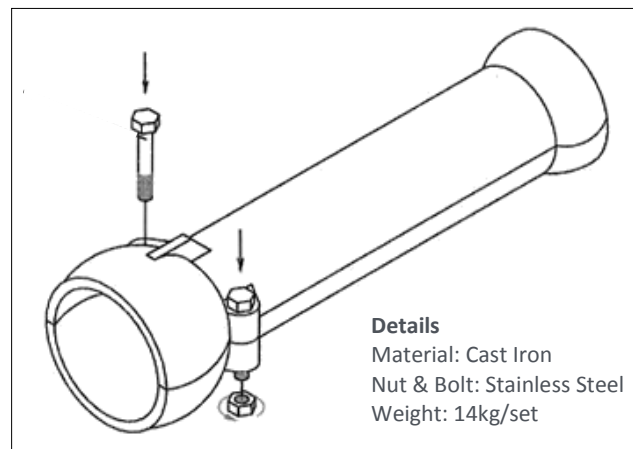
Possible Cable Protection Measures at Crossing Locations
